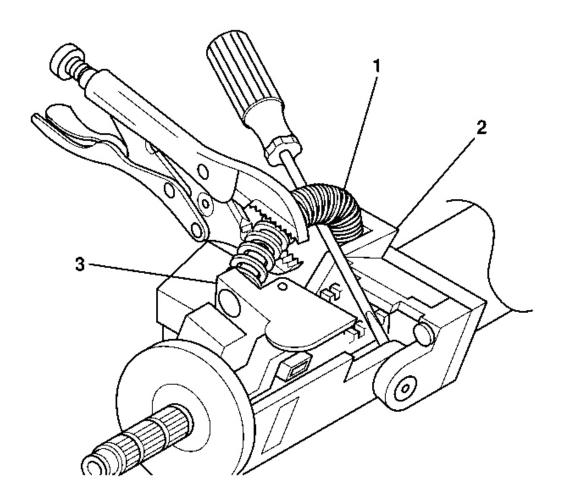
Removing Tilt Spring From Steering Column Support Assembly Courtesy of GENERAL MOTORS CORP.
